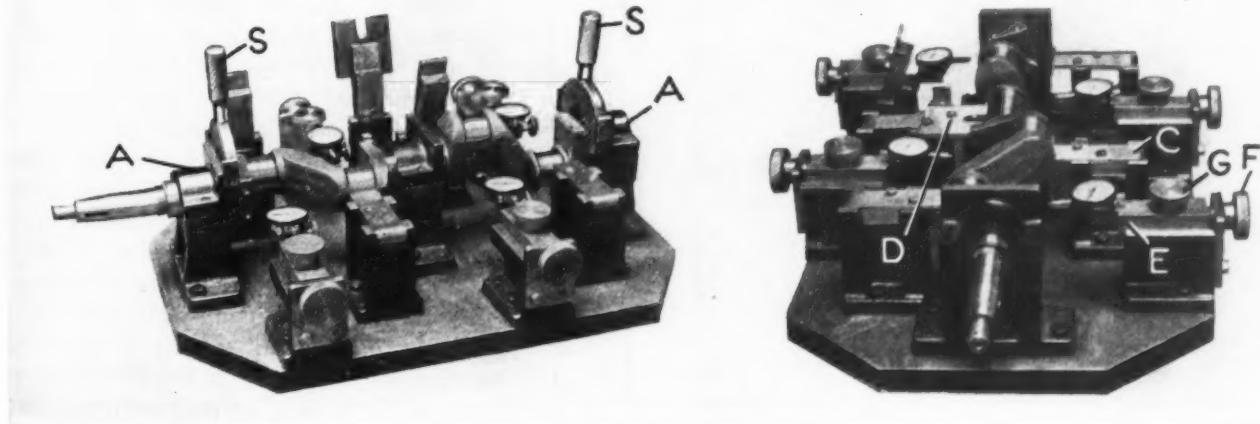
Gaging Length of Compressor Crankshaft between Shoulders with Thickness Gages *S
